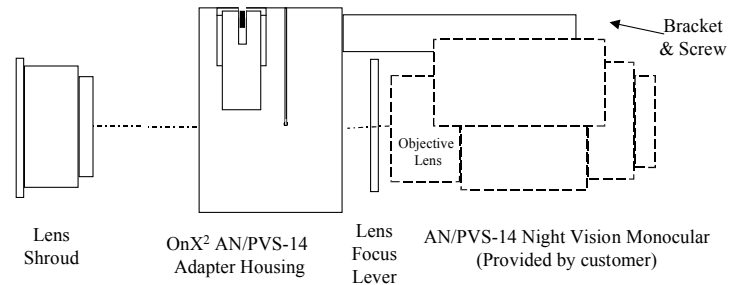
Ultra-OnX² AN/PVS-14 Rugged Coupler/Adapter Kit Assembly
